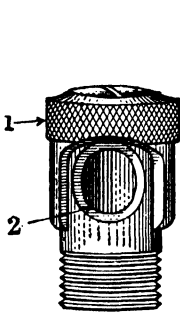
Oil-hole cover. FIG. 110.—Ball valve and felt chamber. FIG. 111.—Oil-hole protector.
